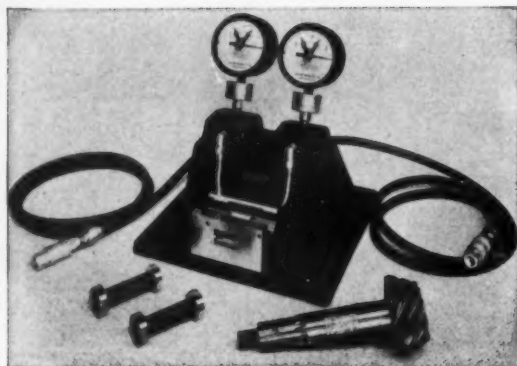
An air gage which measures, simultaneously, two diameters on the pinion shaft. This equipment is used by the machine operator.
